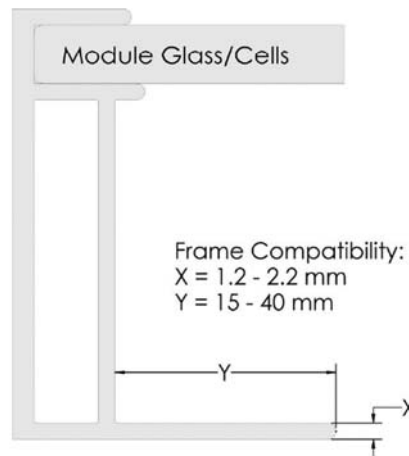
CAMO Clamp Module Frame Dimensional Requirements
